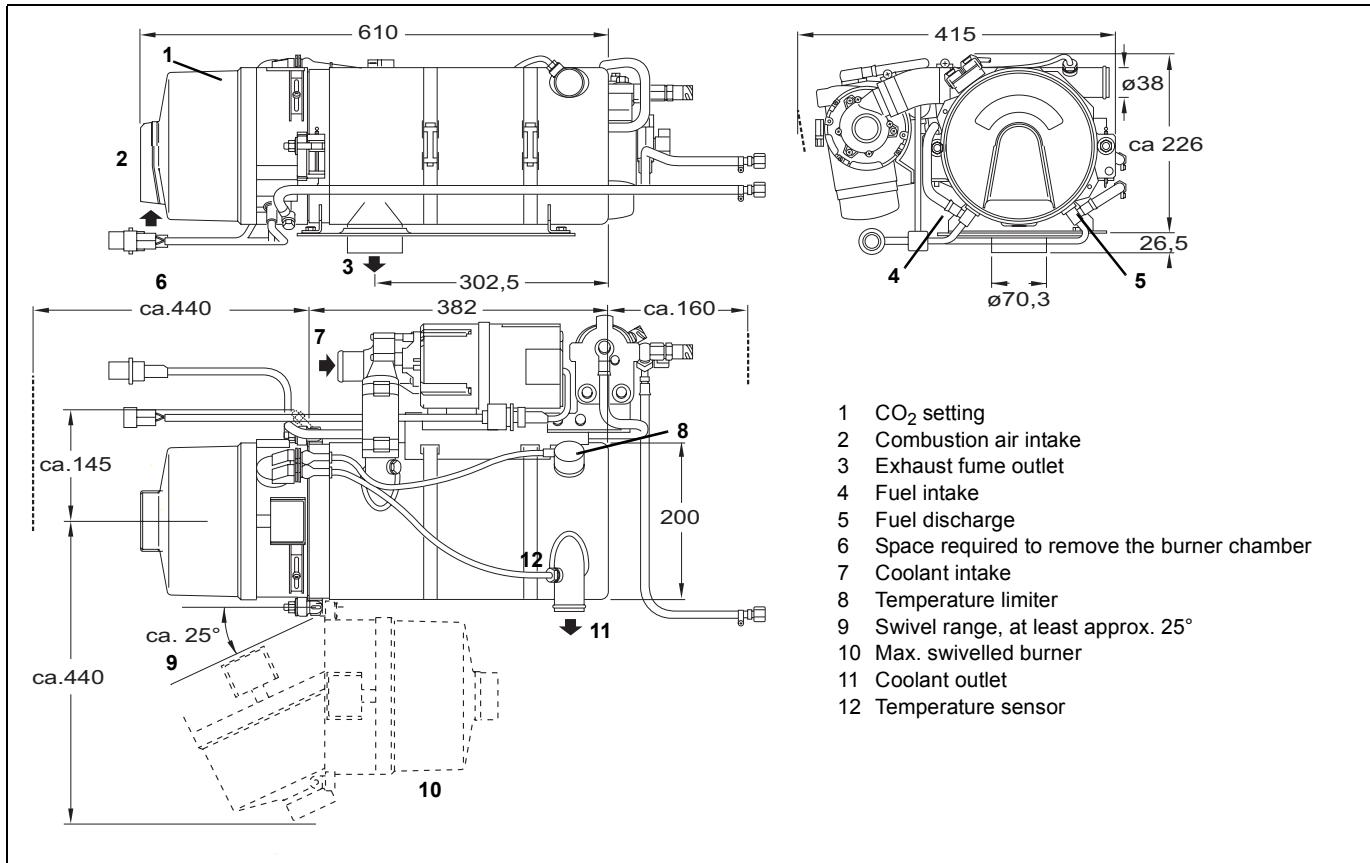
Dimensions of the Thermo 230 / 300 / 350 Rail heater
